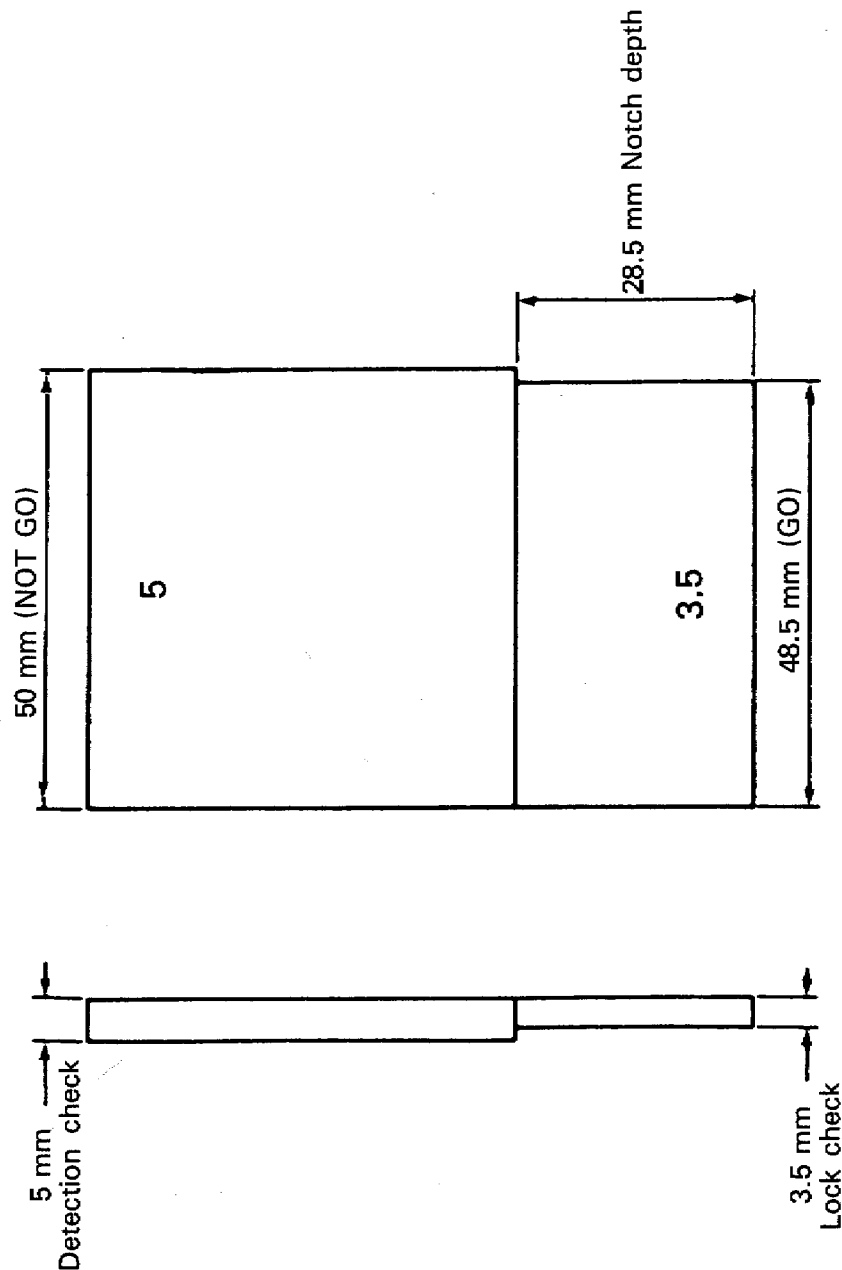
FPL Checking Gauge (Metric) (BRS-SM 225)
